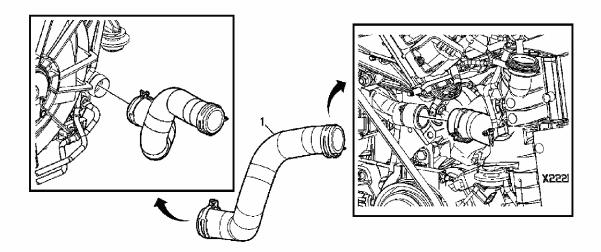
View Of Radiator Outlet Hose (L26) Courtesy of GENERAL MOTORS CORP.
